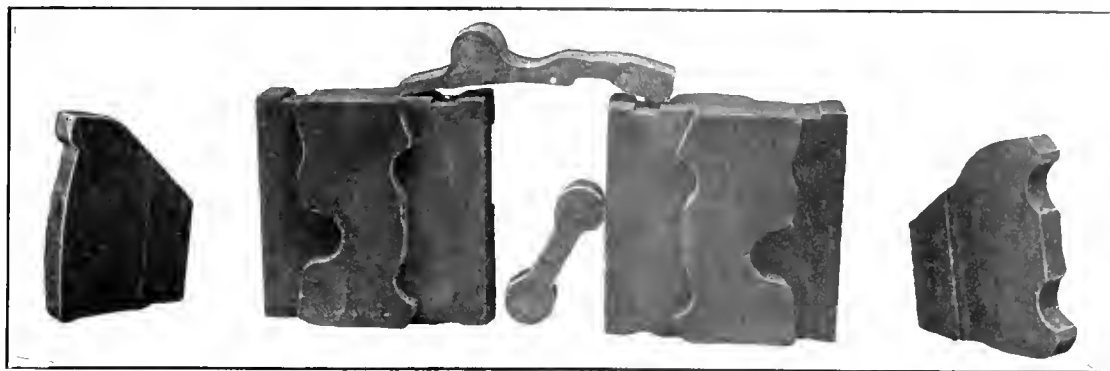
DIES AND HEADERS FOR MAKING DRIVER BRAKE AND SWING HANGERS ON THE FORGING MACHINE.
